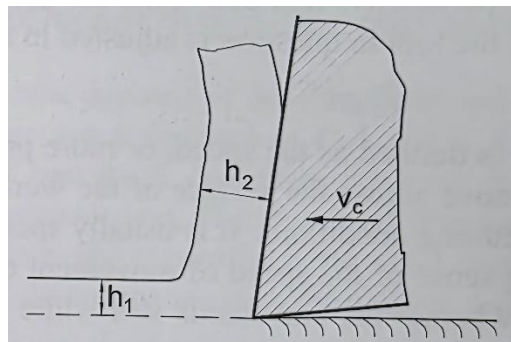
Basic Parameters of cutting process – theoretical chip thickness h_1 (mm), cutting speed V_c (m/min) [19]
